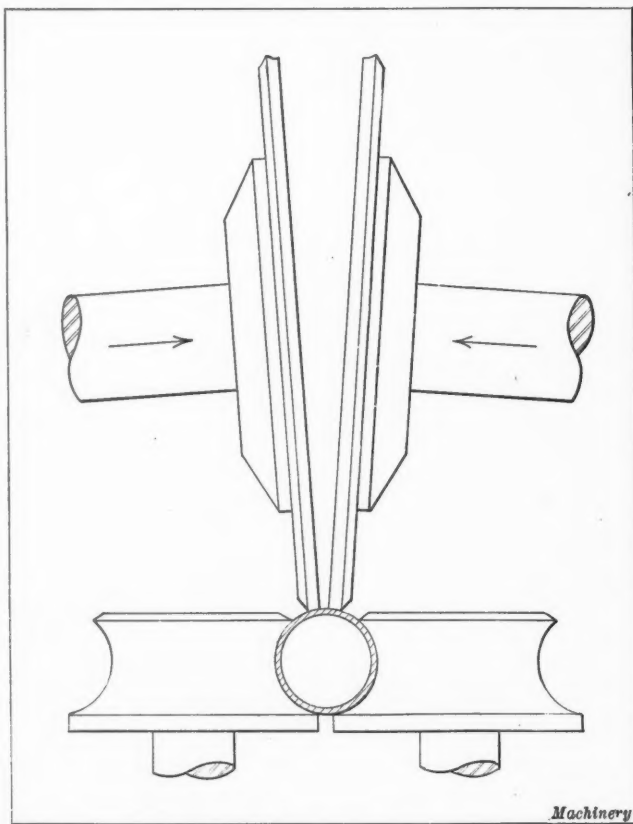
Position of Welding and Feeding Rolls Relative to Work
